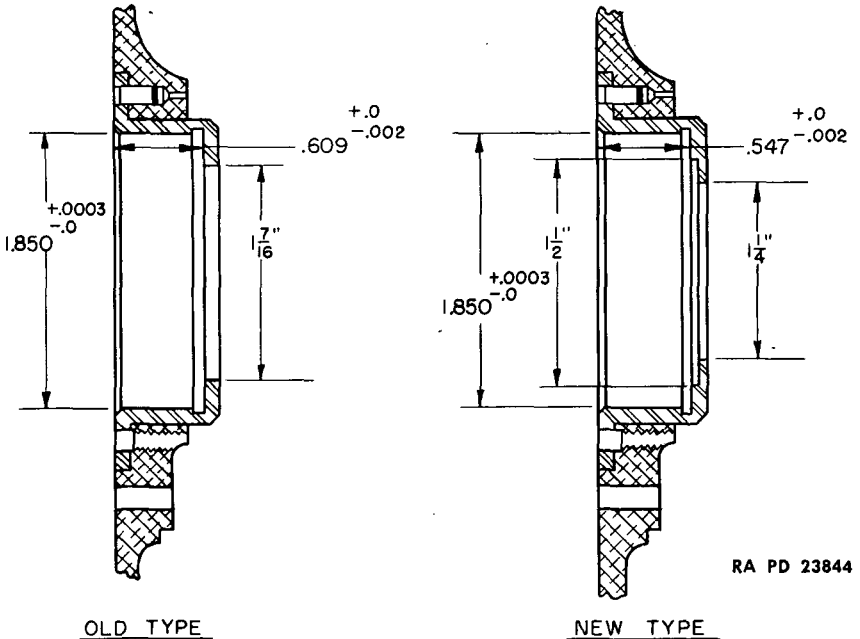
Change Over in Front Head Assembly—Eclipse Generator, Model 31, Type 314
